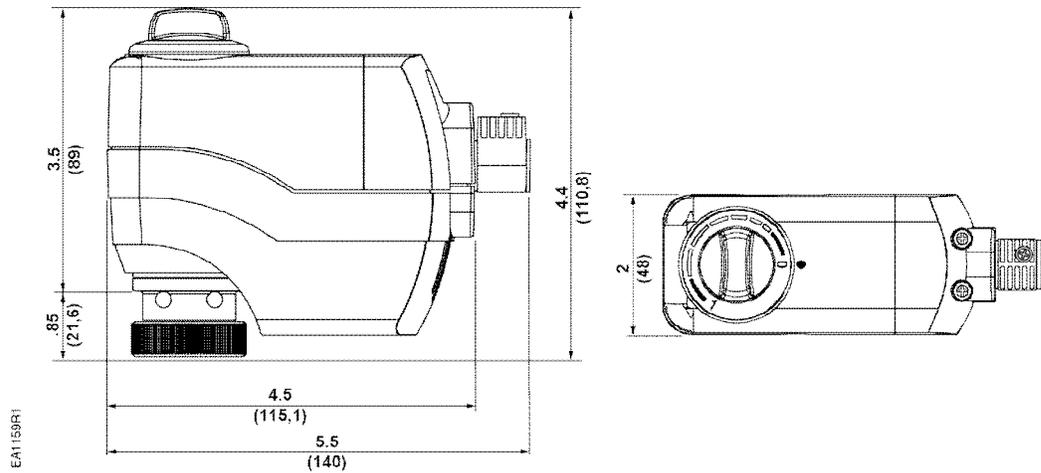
SSC61 Series Actuator Dimensions in Inches (Millimeters).
